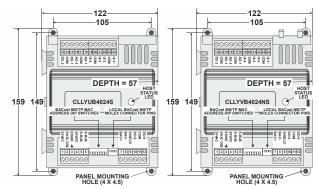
Panel mounting – dimensions (mm) for CLLYUB1012S, CLLYUB4024S, and CLLYVB4024NS, only (CLLYUB4024S and CLLYVB4024NS shown)
